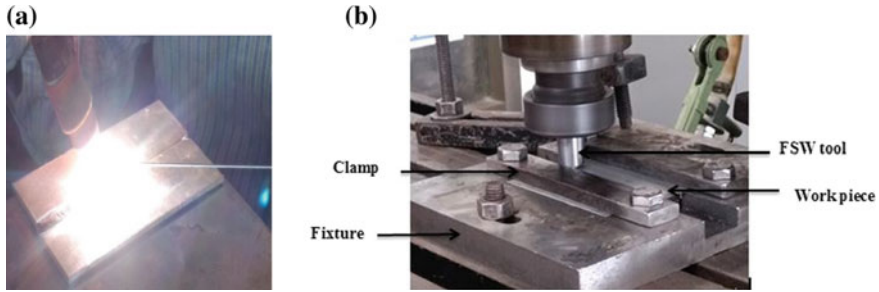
a TIG welding of AA6063-T6 alloy; b FSW of AA6063-T6 Alloy
